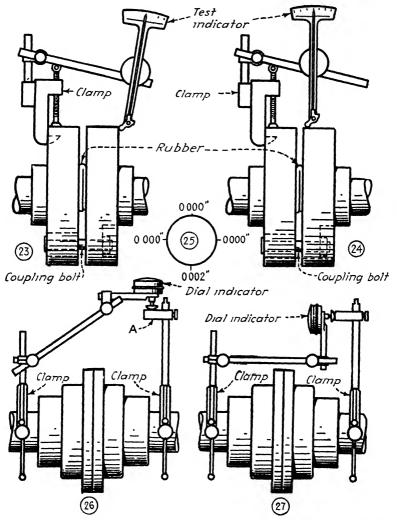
Indicator setup for checking axial and radial alignment. (Courtesy of Power.)
